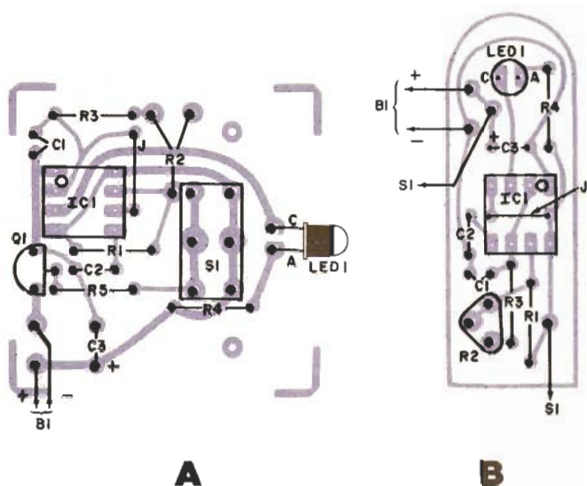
Parts placement guides for the box-style (A) and gun-style (B) infrared transmitters.
